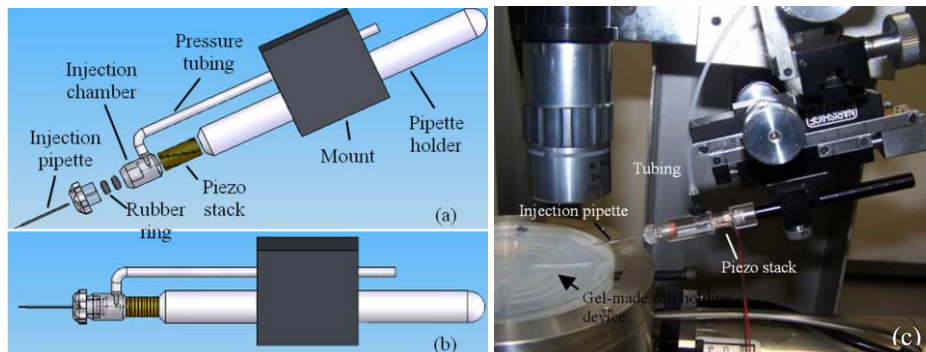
A new design of piezo-driven cell injector. (a) Exploded drawing; (b) Assembly drawing; (c) The close sight of the piezo-driven cell injector.
